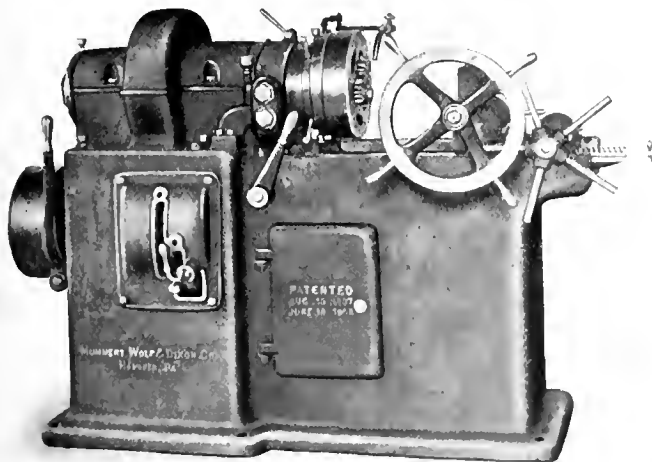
A Plurality Die Bolt-cutter, adapted to the Use of High-speed Steel Chasers.
